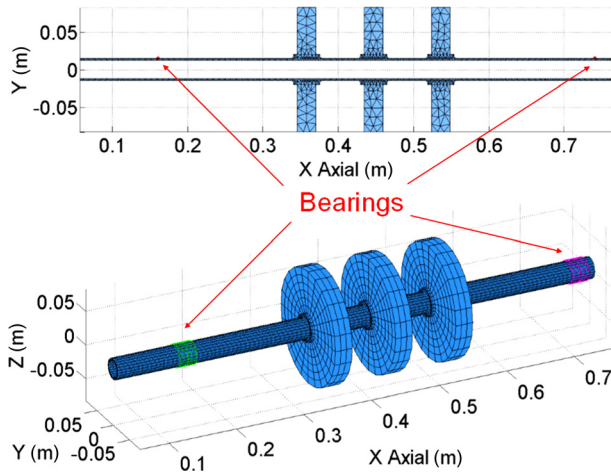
Cross section (top) and 3D solid (bottom) FE mesh models of the rotor supported by two tilting-pad bearings
